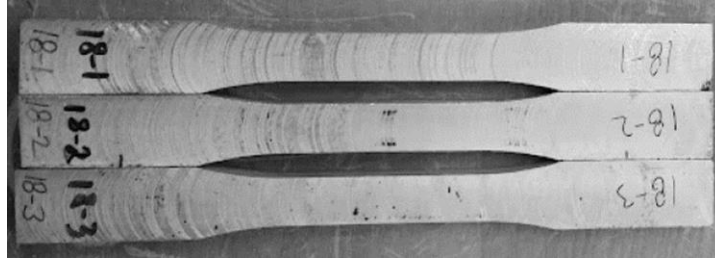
Tensile samples machined from EPS-derived casting, 800 °C.
